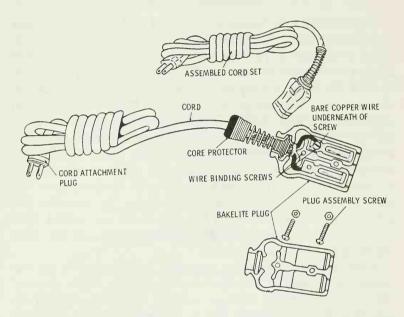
The method used to connect wire to the binding screws in a detachable heater plug. The assembly screws should be carefully tightened to prevent the plug parts from vibrating.
